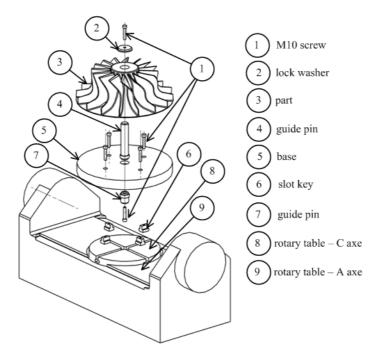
Fixturing design chosen to clamp the impeller on the machine tool table
